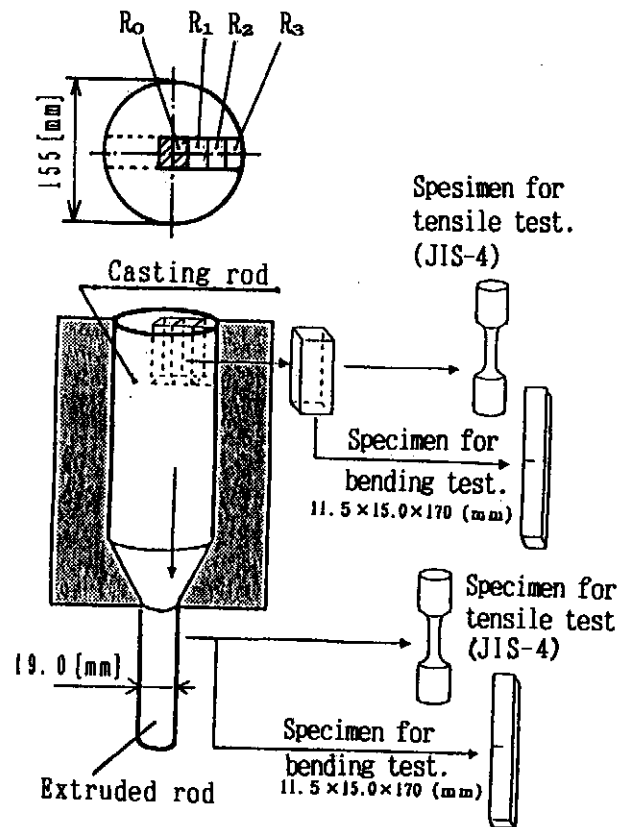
Specimen for tensile and bending tests, machined from extruded and casting rods.
